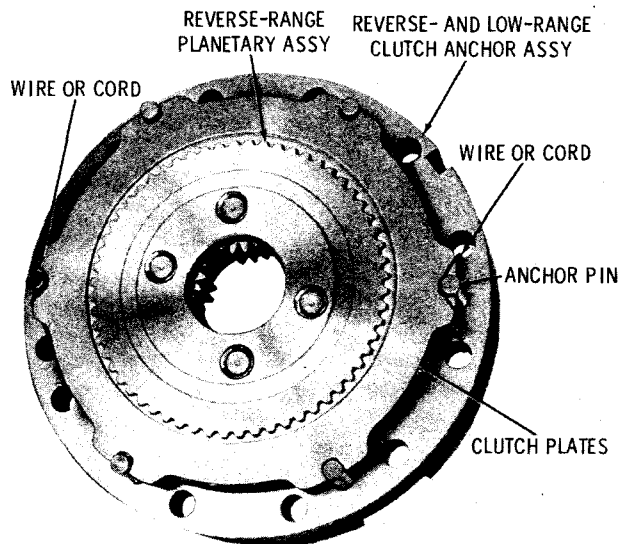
Reverse-range clutch plates and planetary wired in position on reverse-and-low-range clutch anchor
